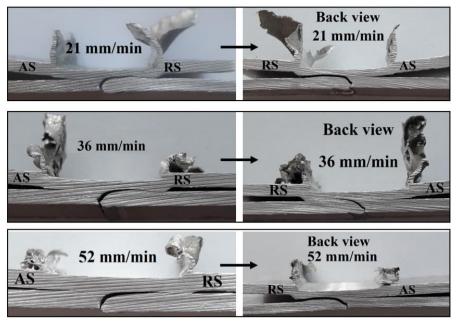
Macro fractured views of weld tensile samples after tensile test
